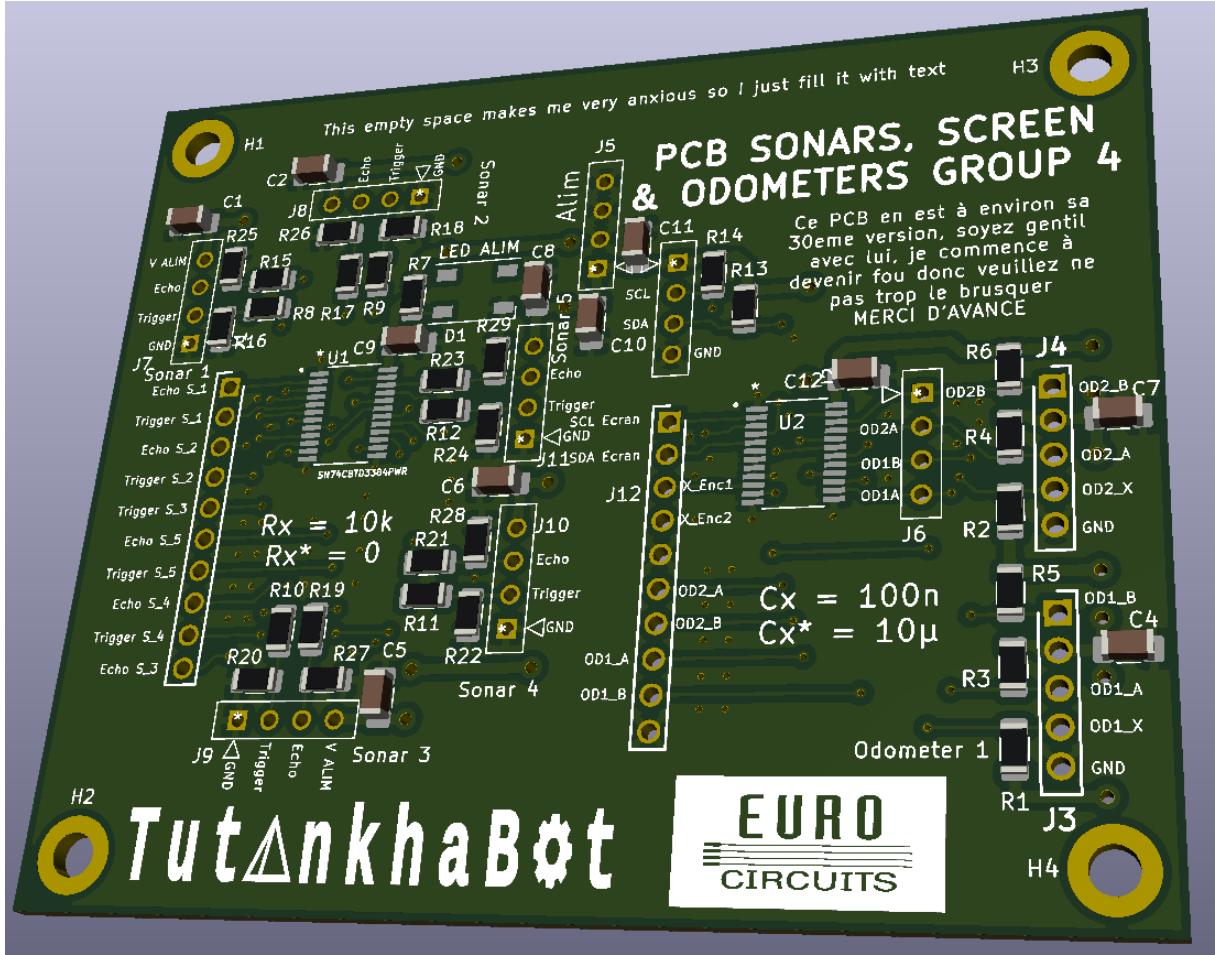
3D view of the routed PCB for the sonars, screen & odometers interface
